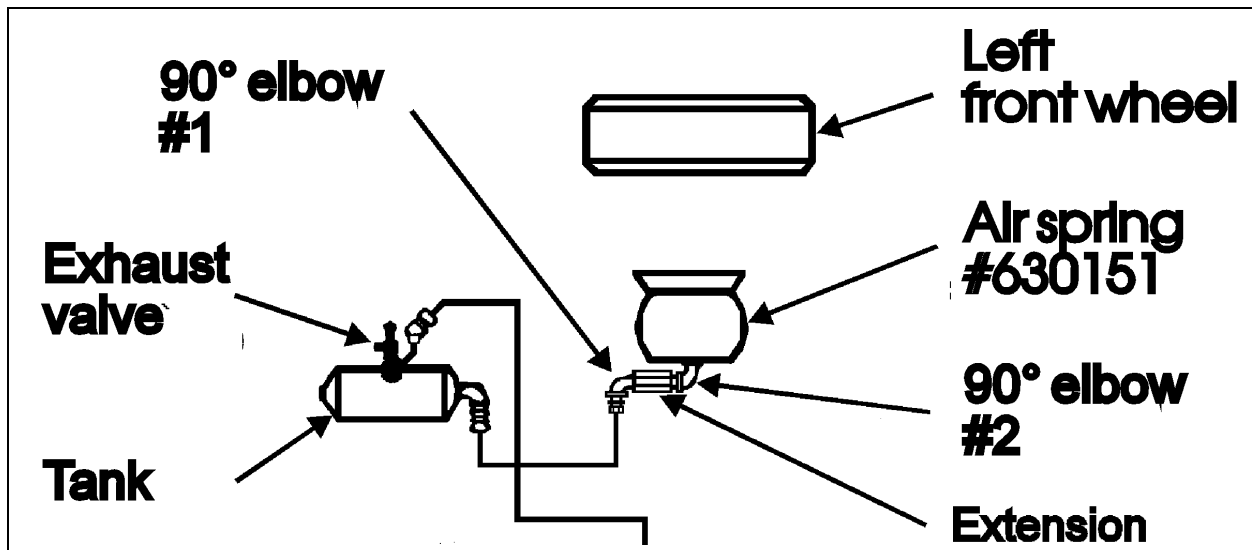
TOP VIEW OF AIR SPRING AND TANK (LEFT SIDE)
